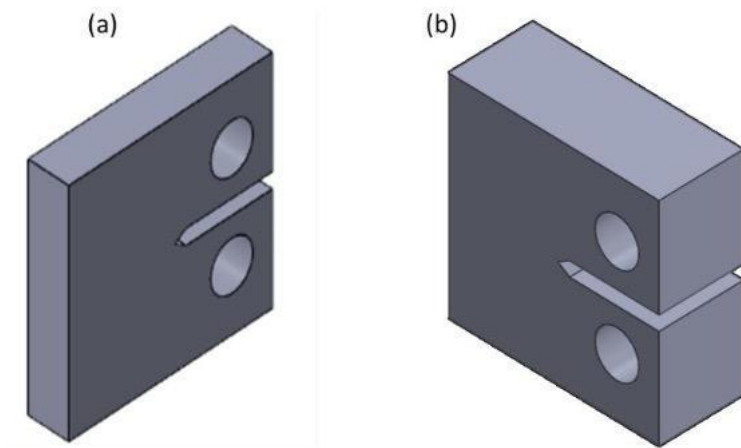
Schematics of the (a) FCGR and (b) fracture toughness specimens after machining
